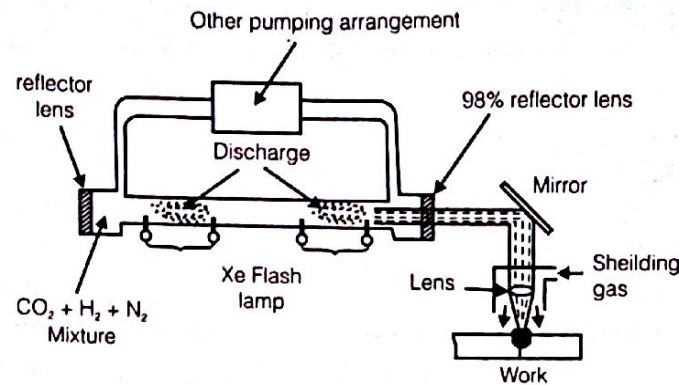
(b) Set up of CO₂ Laser beam welding
